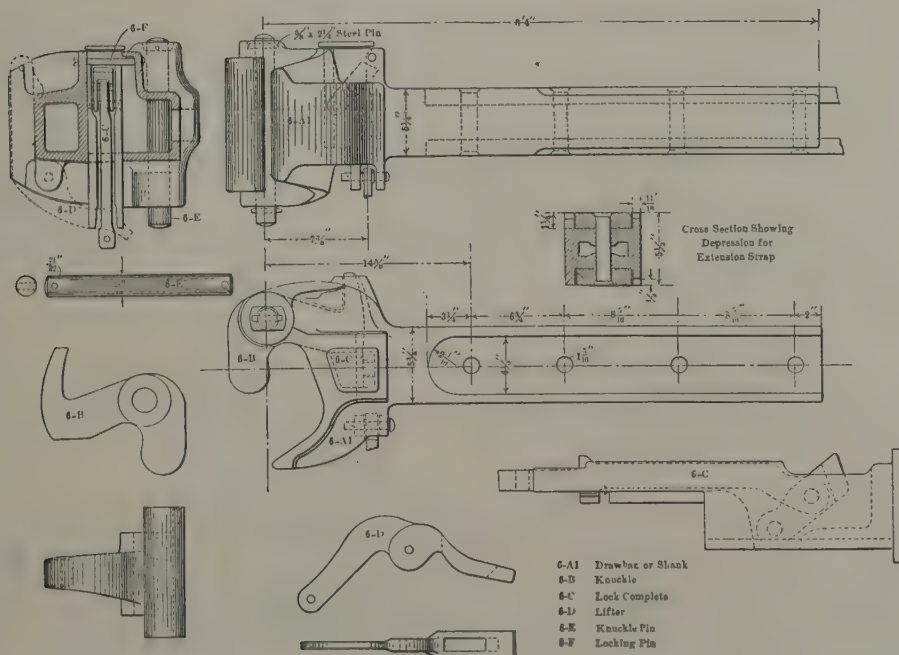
Tower Passenger Coupler and Parts. National Malleable Castings Company.
